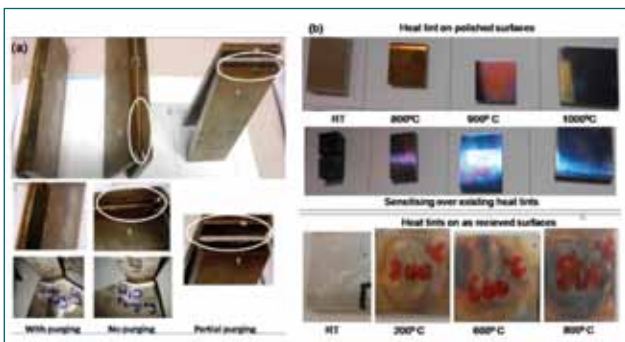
Heat tints (a) on abutted surfaces in the root side of fillet weld joints, in which no purging or partial purging provided during welding, (b) created on base metal with polished and as received surfaces.
